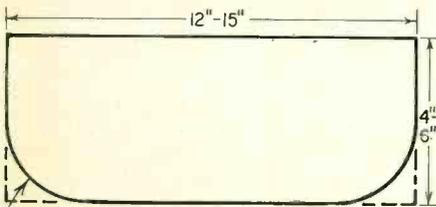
Sheet metal for light shield of Fig. 1 can be cut quickly with tinsnips.
